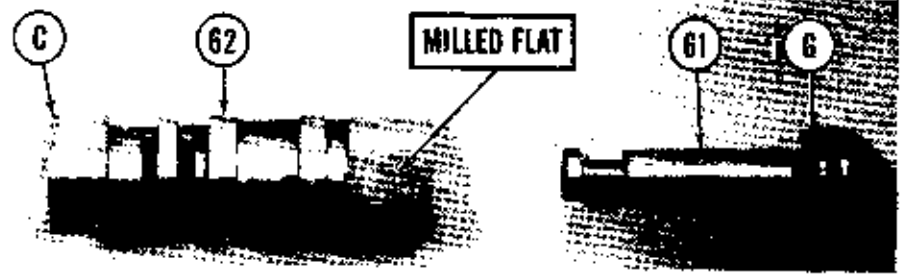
View of unloading valve (61) and unloading valve bushing (62). Milled flat on bushing must be aligned with the two threaded holes in the control valve casting as shown in Fig. FO82. Chamfered end (C) of bushing should be flush with machined surface at open end of lift cylinder.
